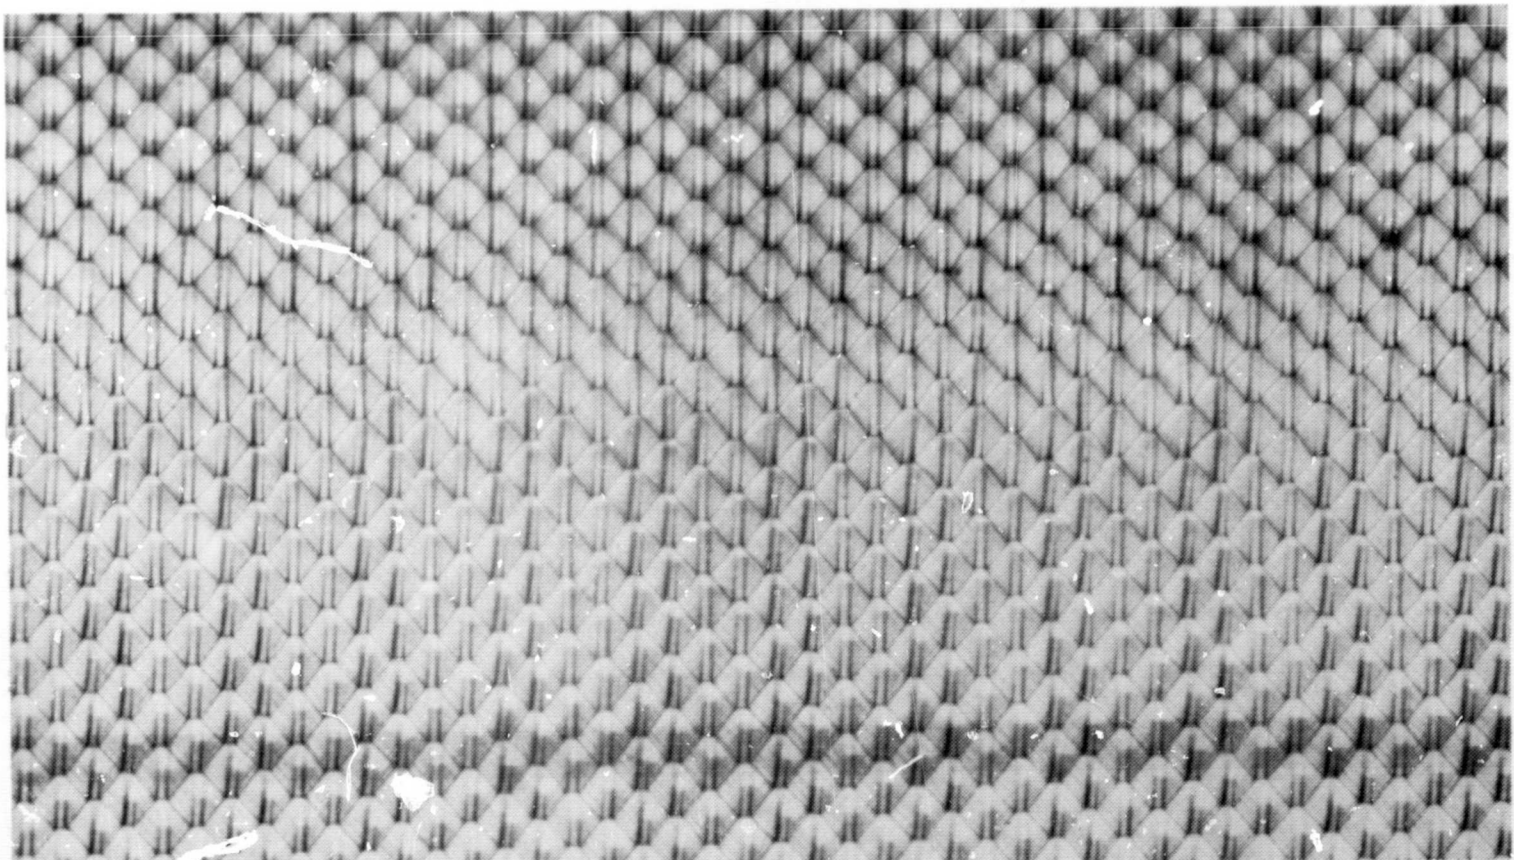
Typical x-ray view of honeycomb panel L9000002-1007 - bottom surface.
